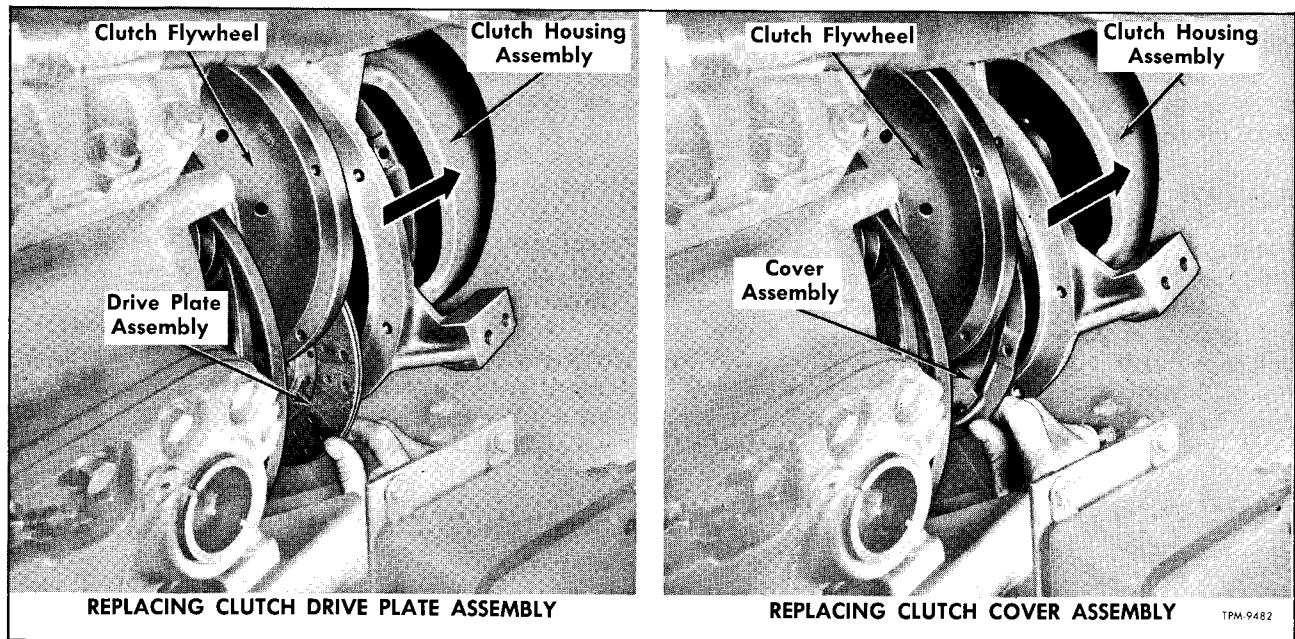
Replacing Clutch Drive Plate and Cover (Compressor in Coach)
